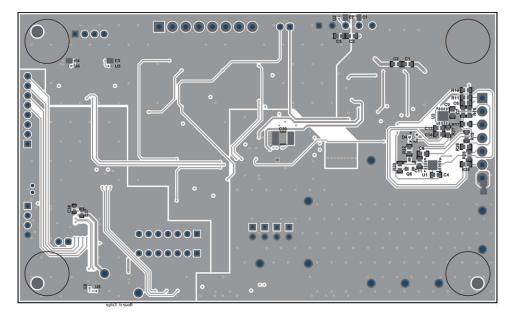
BQ40Z80EVM Bottom Layer Composite
